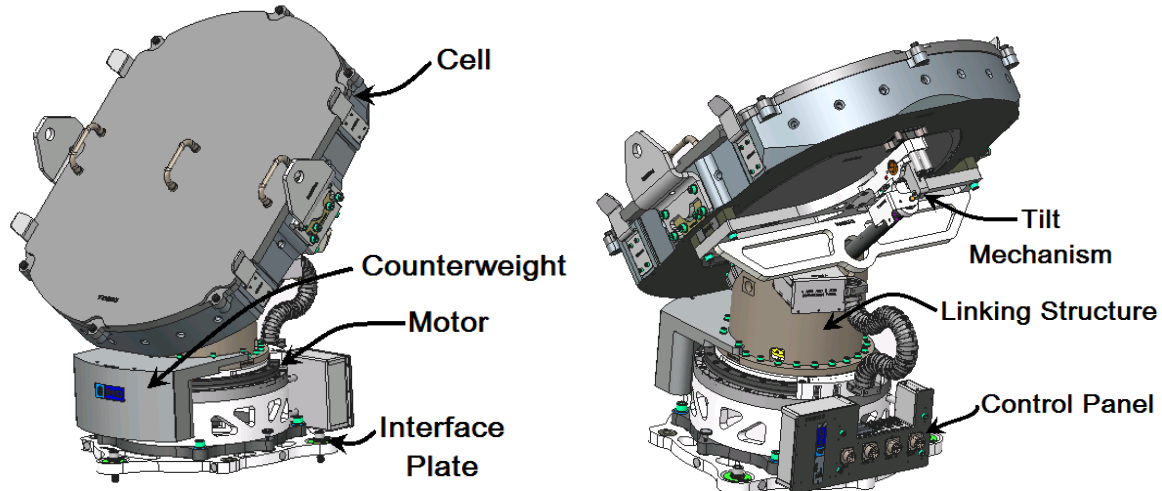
Instrument selection mirror. (Left) ISM assembly front view, (Right) ISM assembly rear view.
